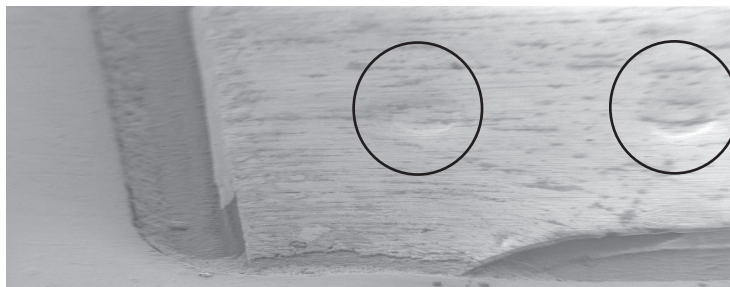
Gold stud bumps deformed the pads on Kapton PCB
